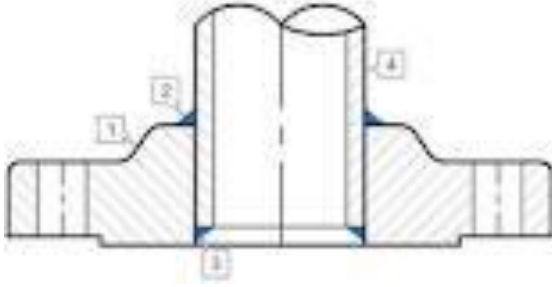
Weld Diagram.
